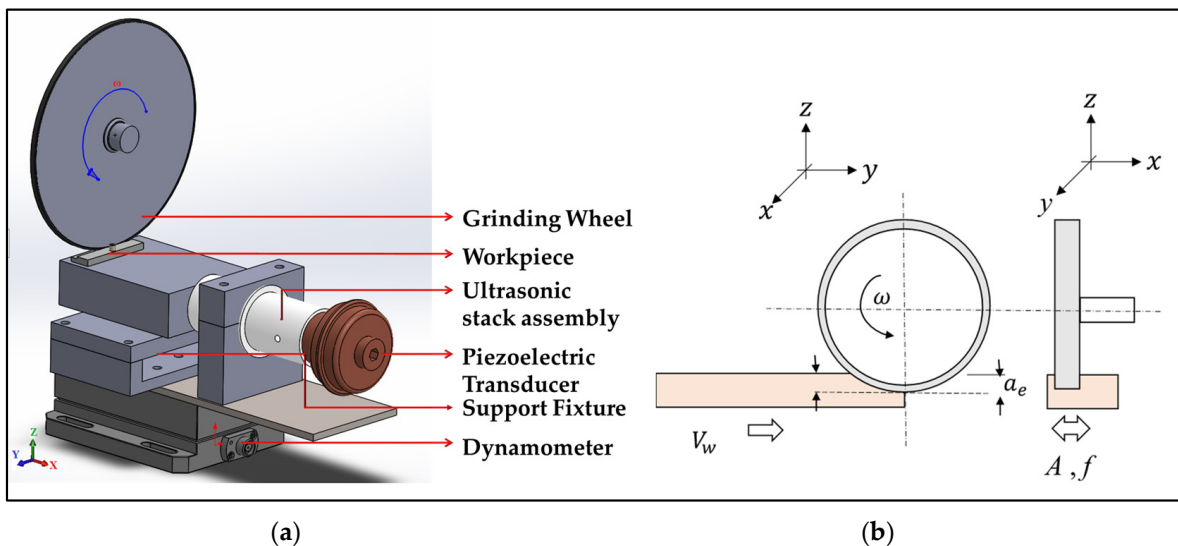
(a) Schematic of ultrasonic stack assembly and fixtures mounted on dynamometer. (b) Schematic of UVAG parameters with respect to the grinding wheel.
